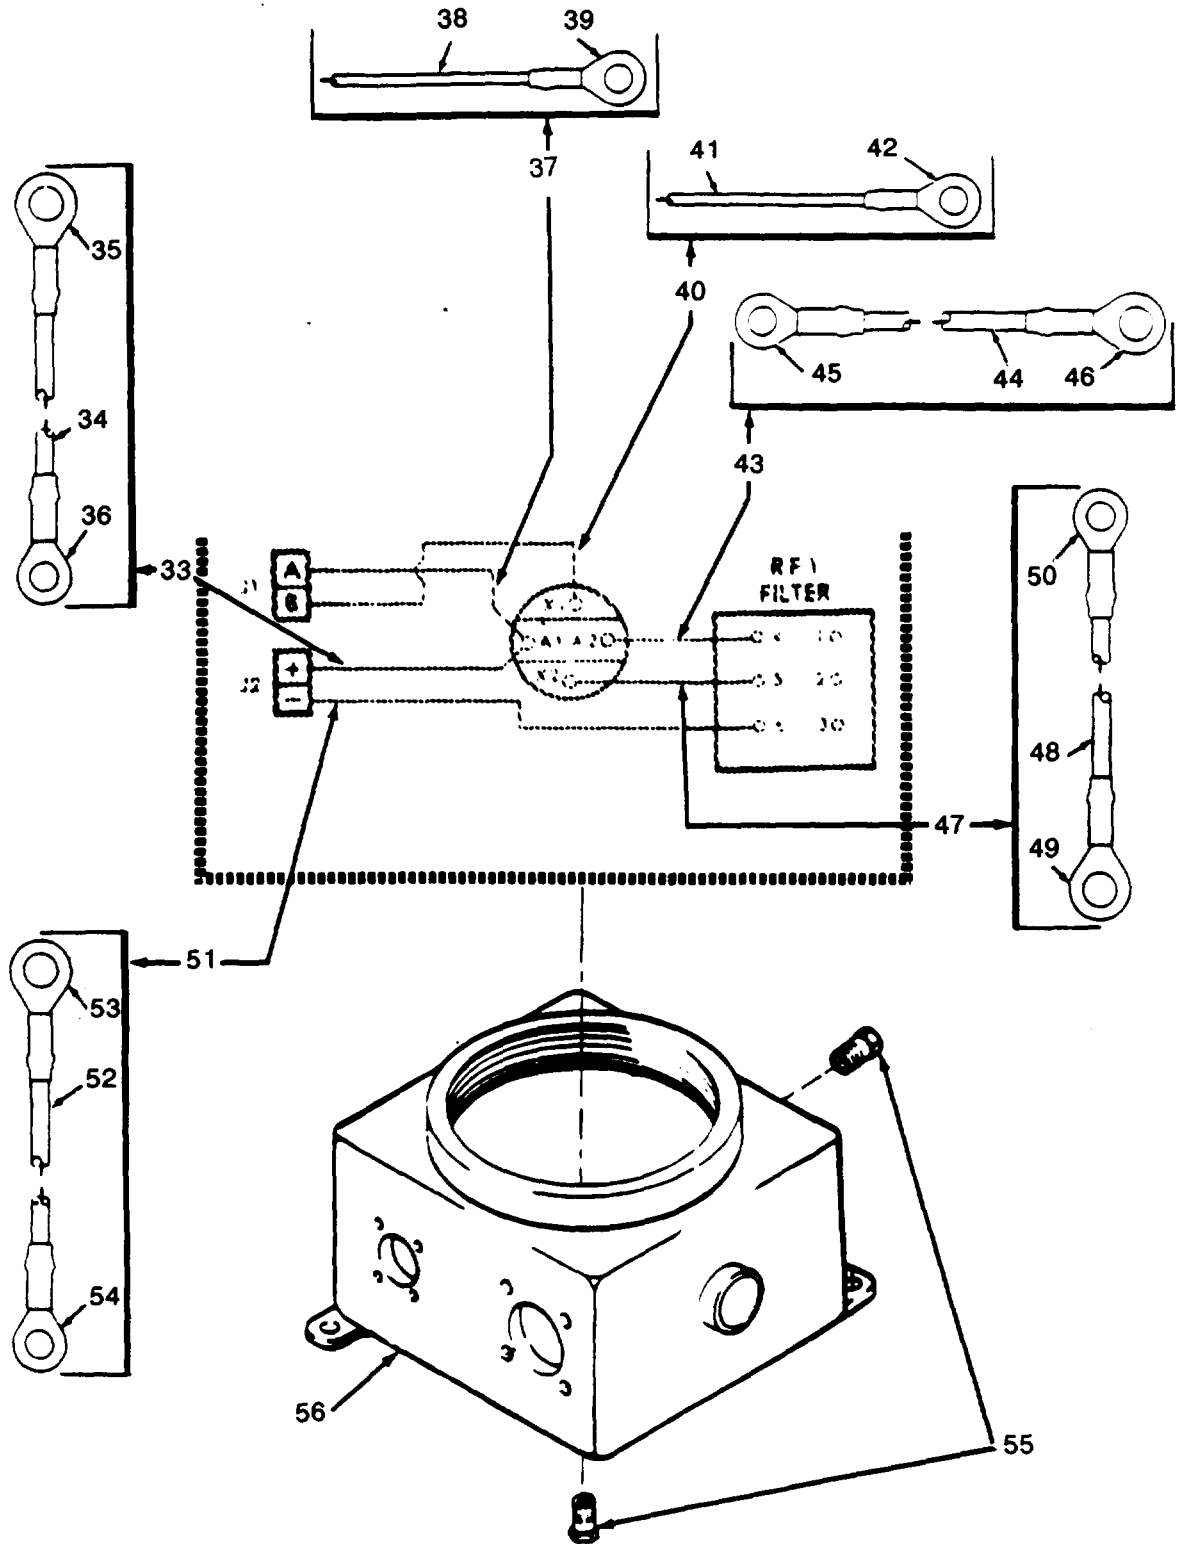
Junction Box Assembly (Sheet 2 of 2)
